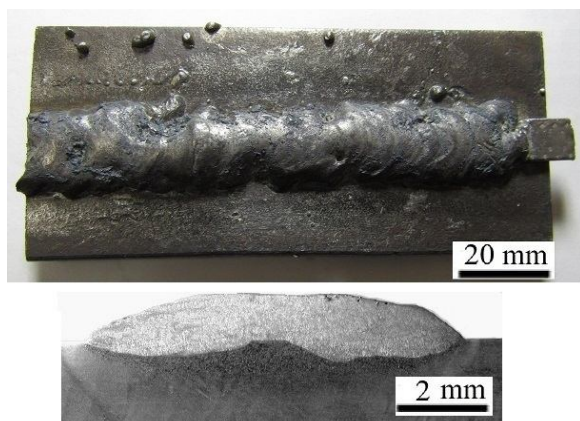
Specimen No.3, (a) welded track (b) cross section
